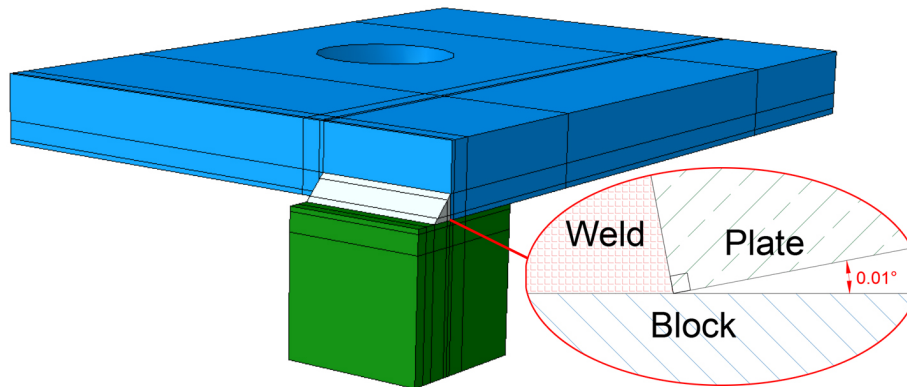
The test specimen part with transverse fillet welds
